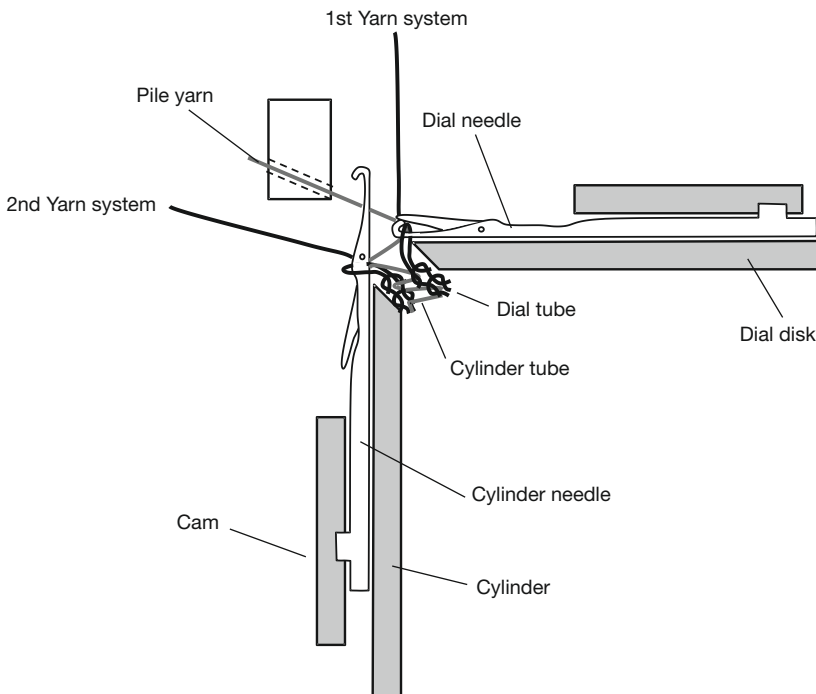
Production of a knit spacer fabric on a circular knitting machine
